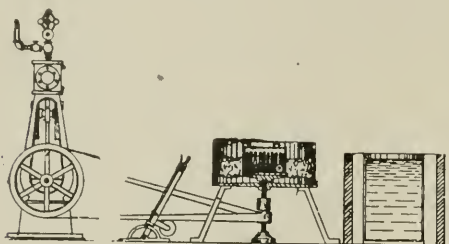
WIRE COIL GALVANIZING MACHINE.
